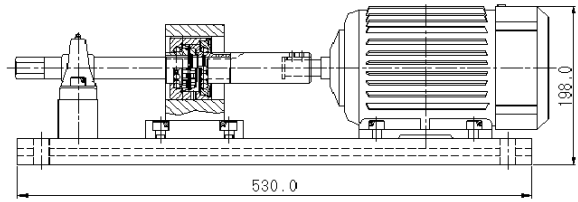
Endurance evaluation testing machine drawing of R-L clutches
